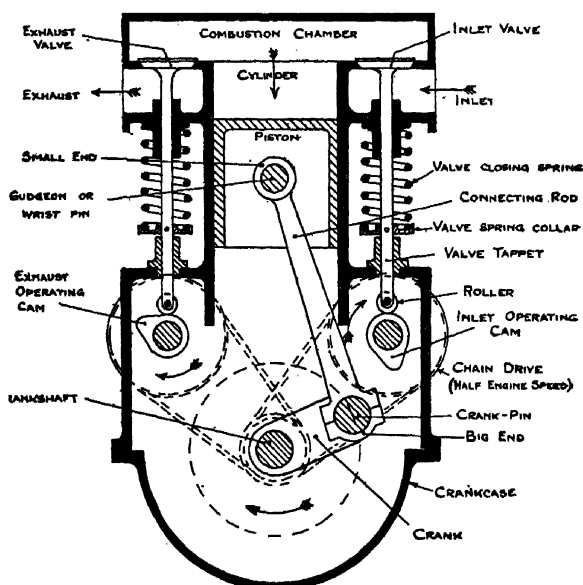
Illustrating the Components of the Petrol type Engine.
